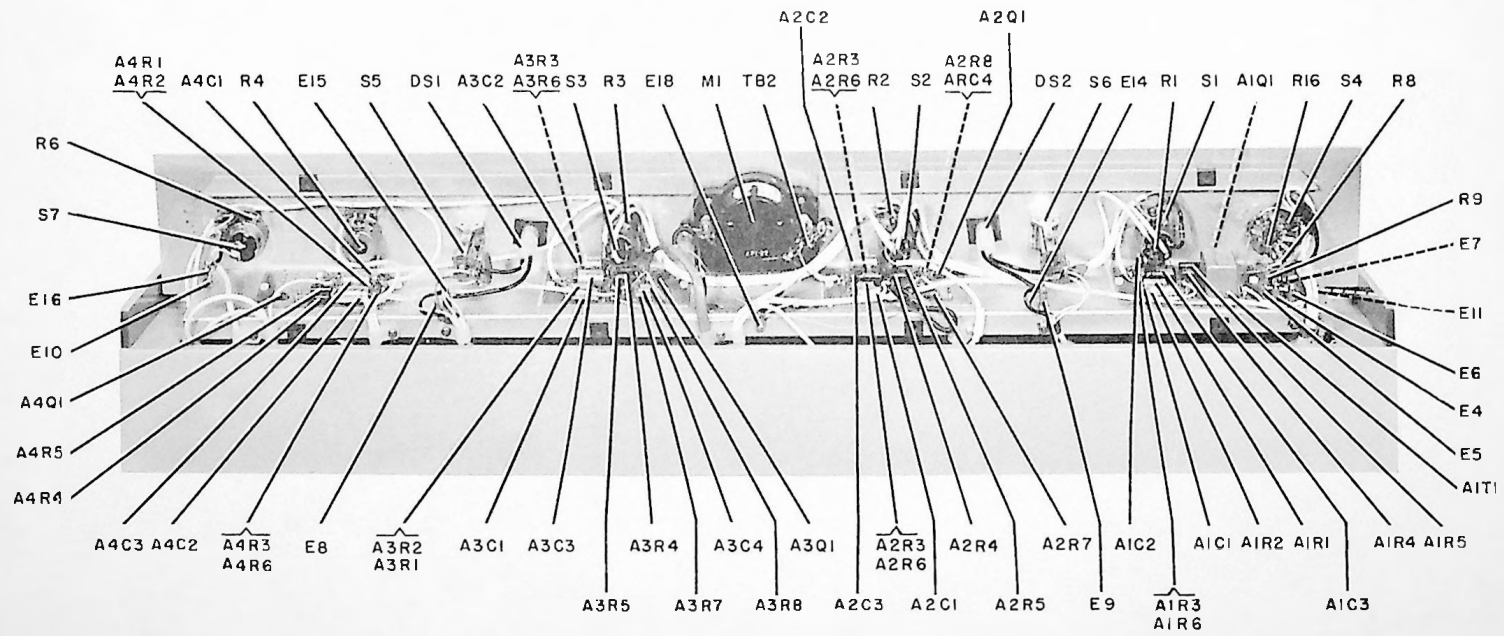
808A-1 Console, Rear View of Front Panel
